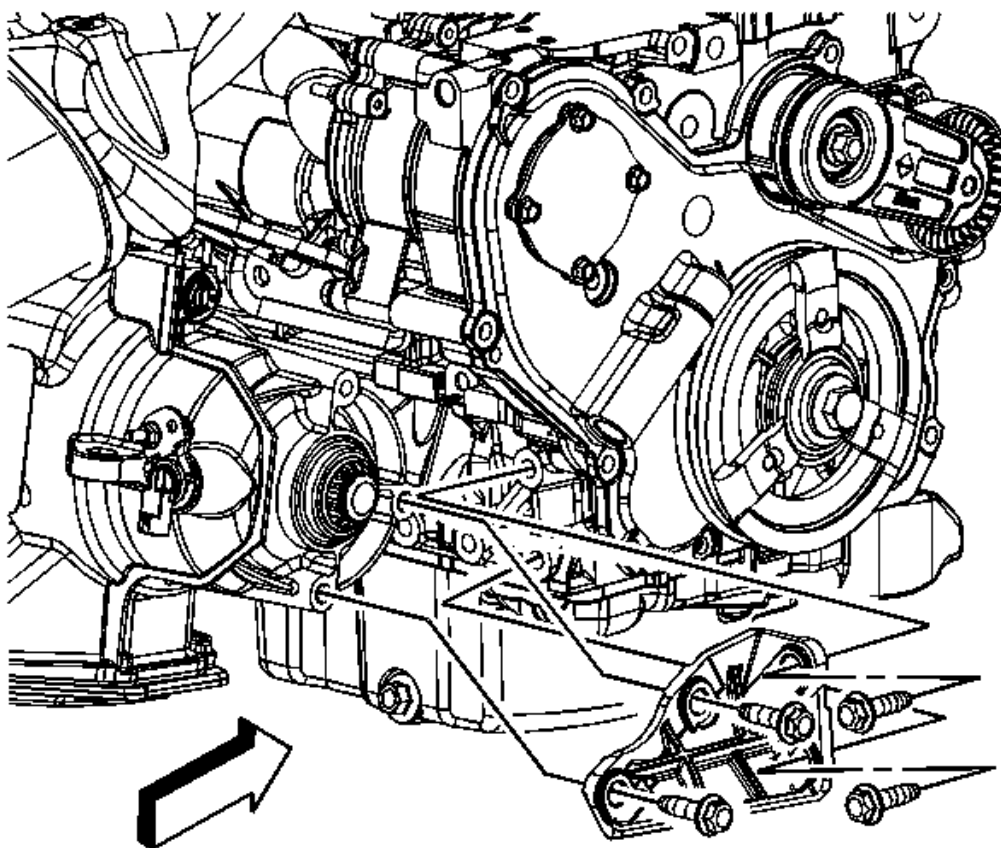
View Of Transaxle Brace-To-Engine Bolts
